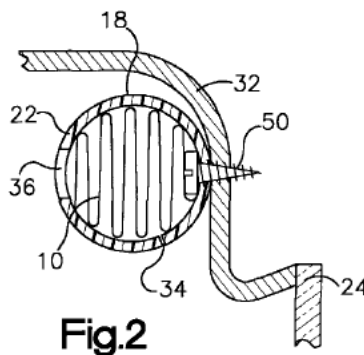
shows a cross-section through a roof frame of a vehicle having an installed, folded up head gas bag 10. *Id.* at 2:41–42. Fitting sheath 22 may
